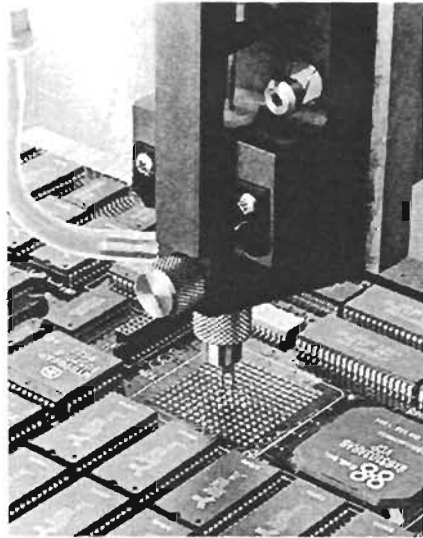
Syringe-type dispensing is a common method used to apply solder paste or adhesive (a) the nozzle is lowered on to the printed circuit board (b) solder paste or adhesive is forced out of the nozzle (c) the nozzle is lifted clear of the printed circuit board and moved to the next application point
